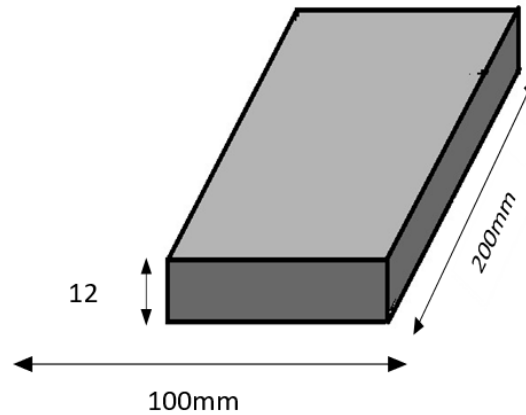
3 Schematic diagram of the workpiece with dimensions
